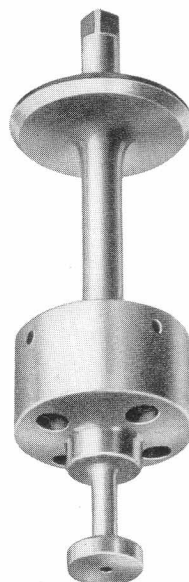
Perspective view of Superheater Header with Multiple Valve Regulator shown designed for fitting between the Superheater and the Cylinders.
